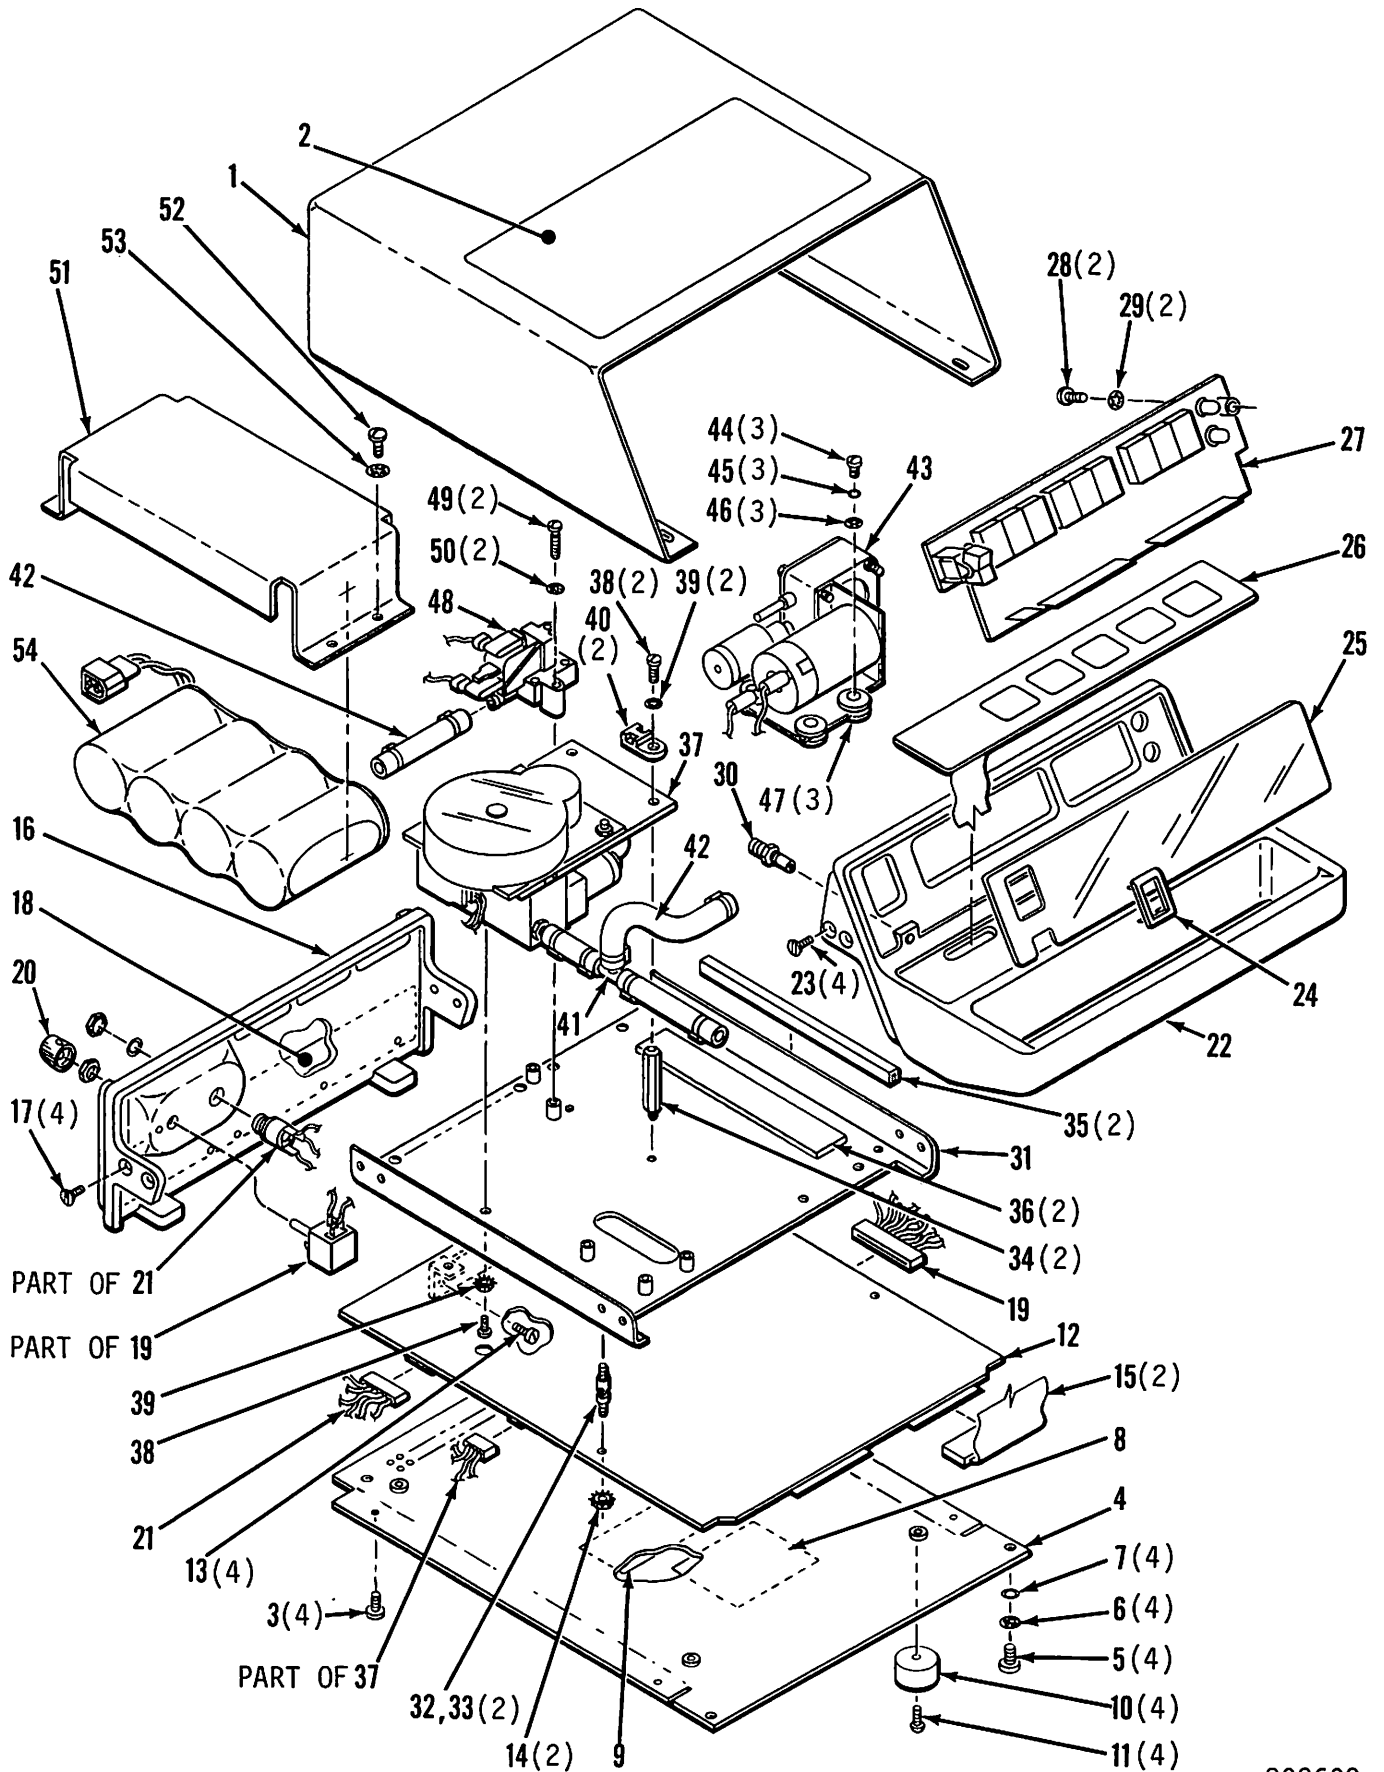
LS 100 FINAL ASSEMBLY
